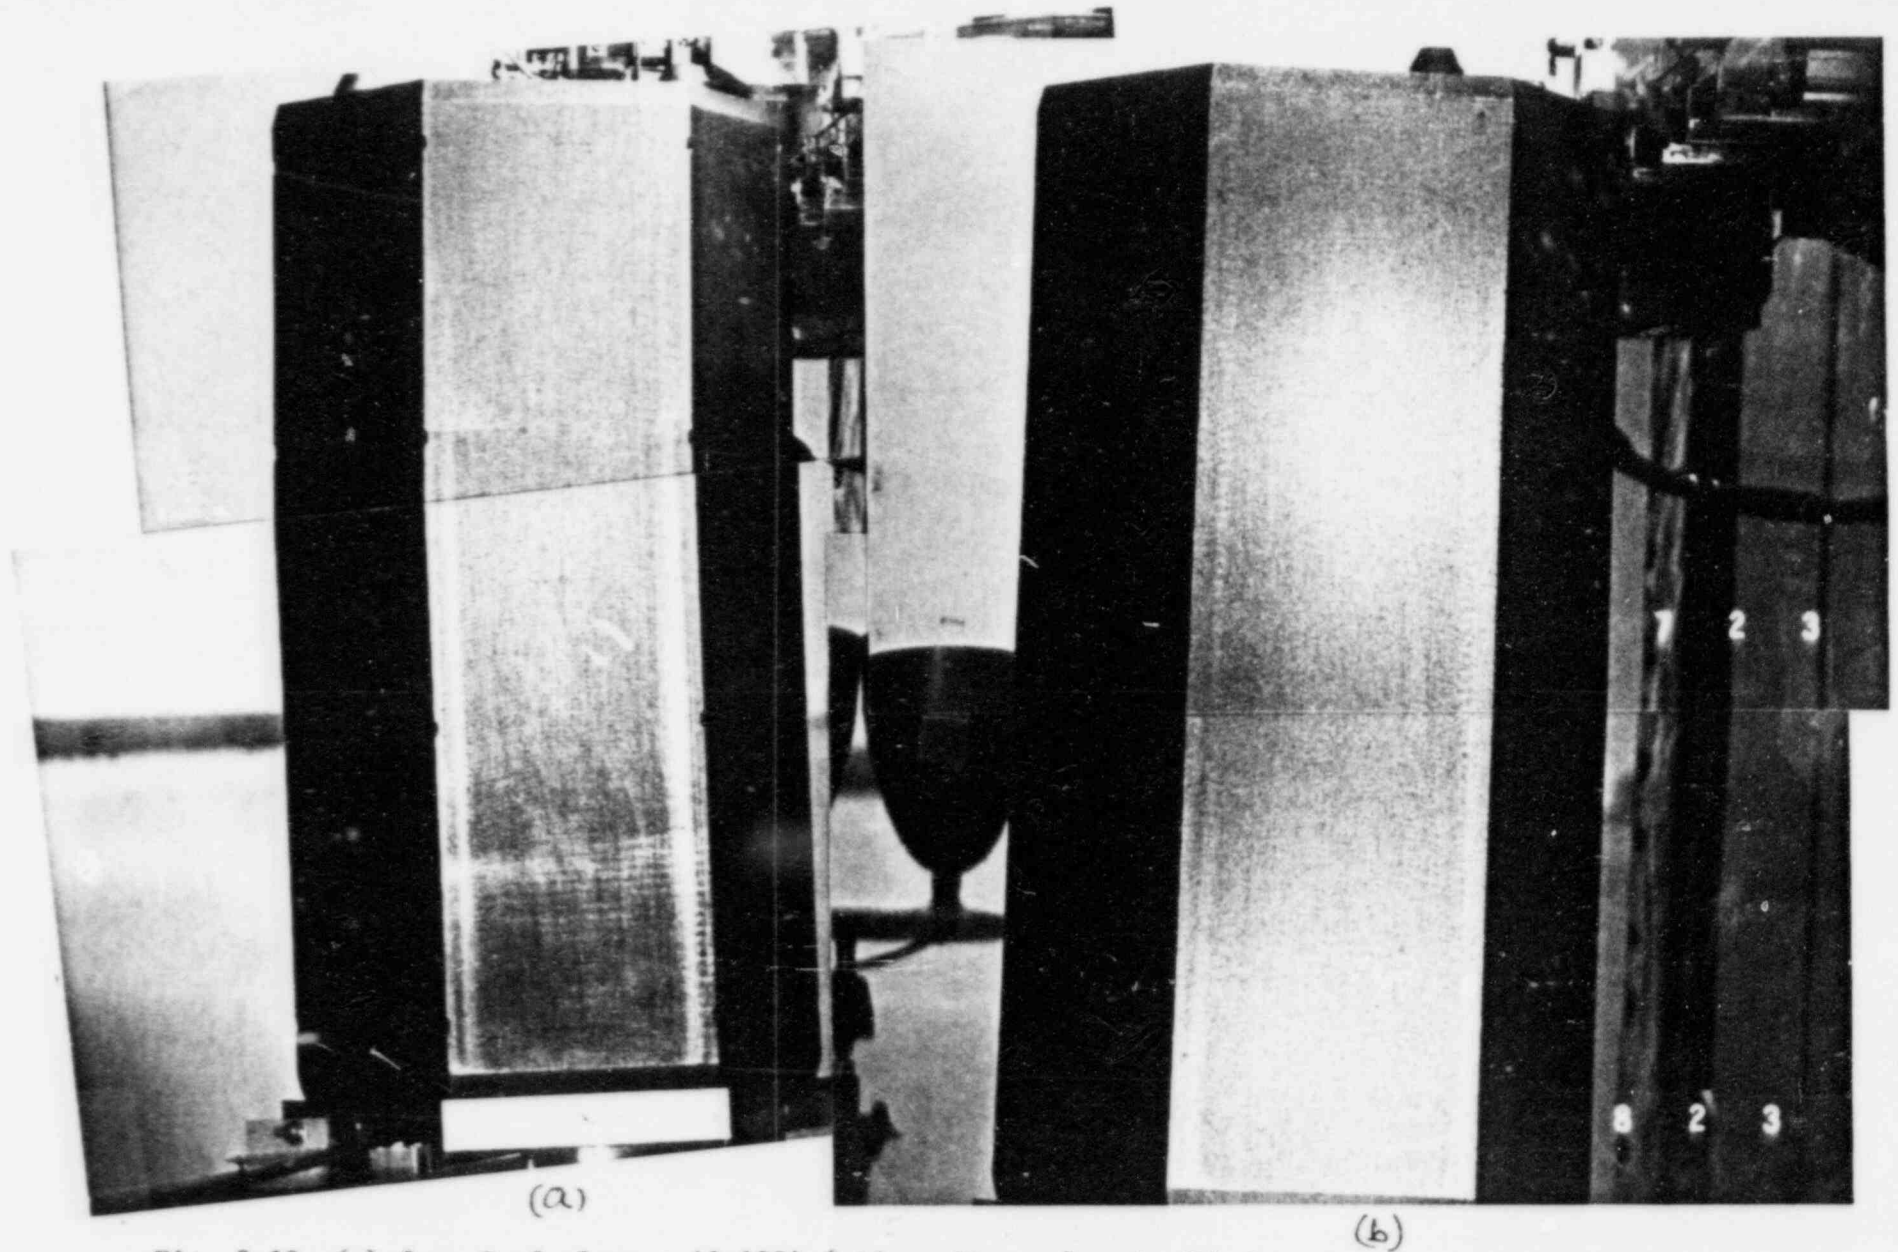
(a) face C of element 41-1004 (side reflector) and (b) face F of element 1-2396: examples of rubbing marks
